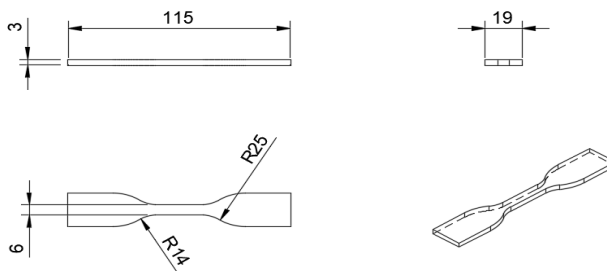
ASTM D638 Type IV specimen (all dimension in mm)
